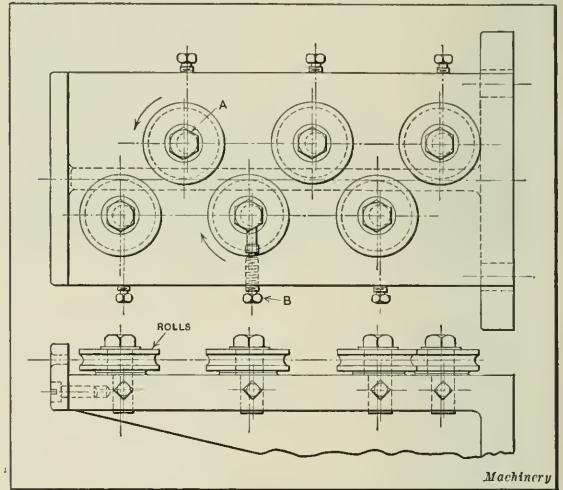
Six-roll Eccentric-stud Wire Straightener
